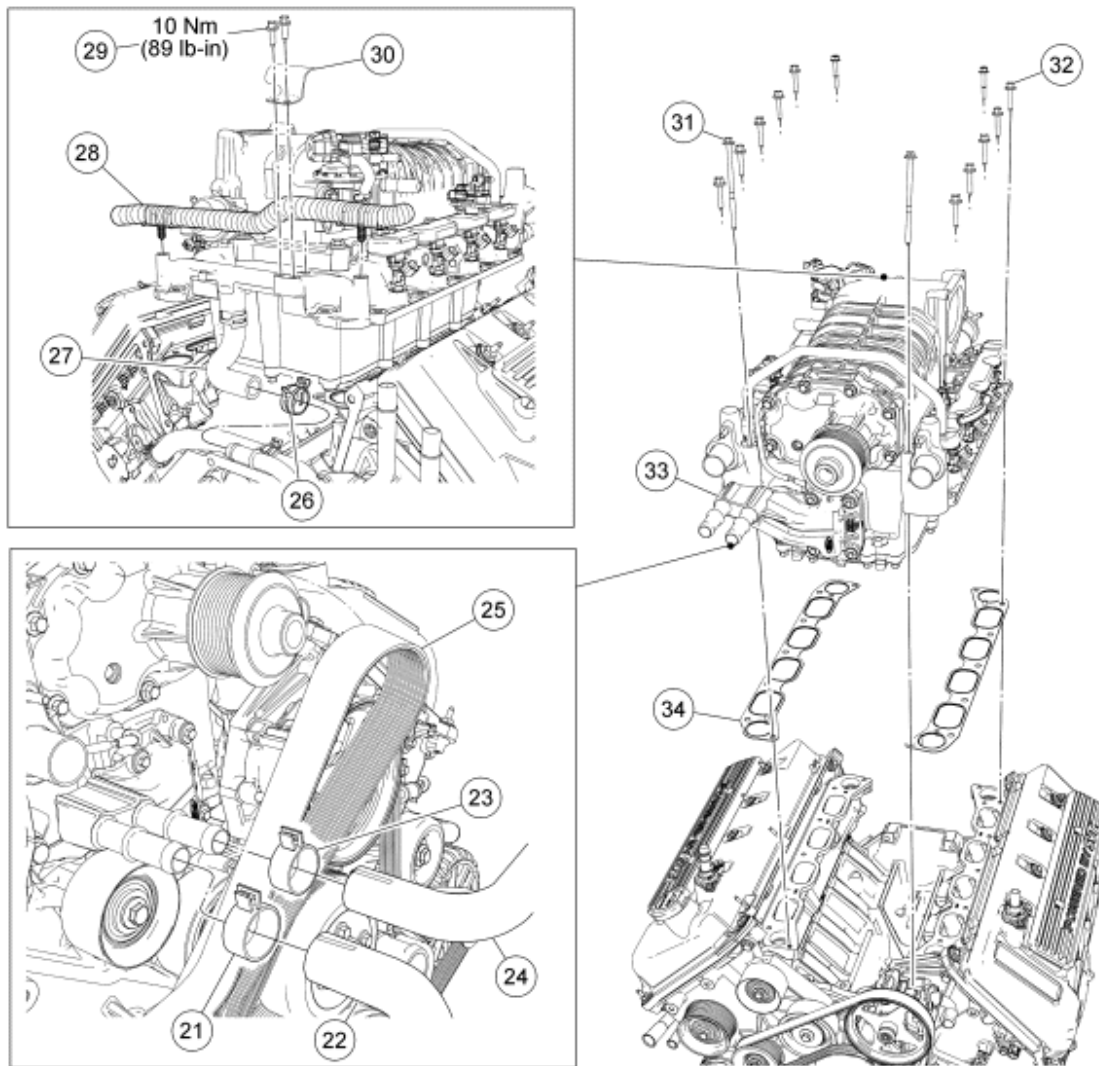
Exploded View Of Intake Manifold With Torque Specification (1 Of 2)
